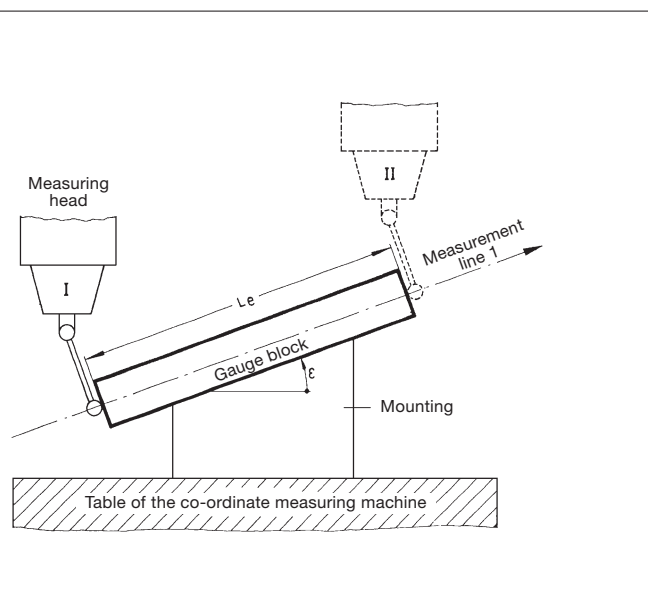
Individual gauge block arranged obliquely in three dimensions on the table of a co-ordinate measuring machine, showing an outside dimension  $L_e$  being measured.
